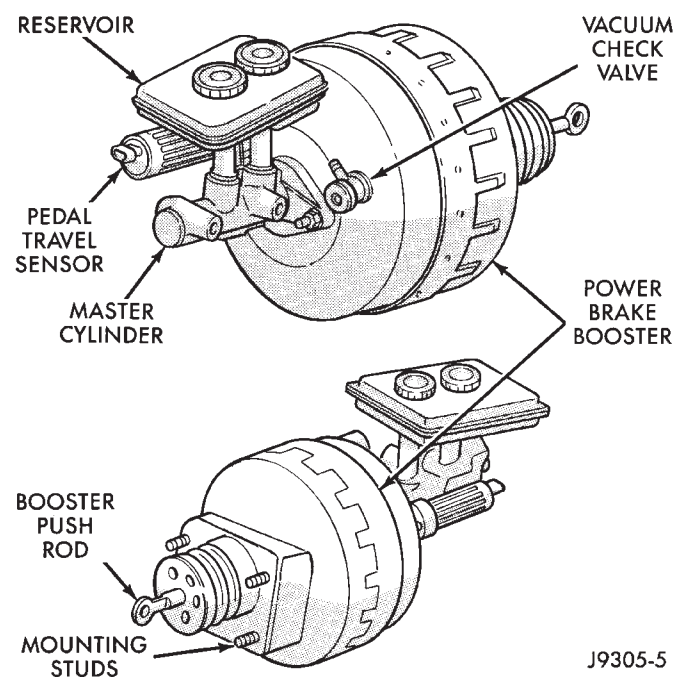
Antilock Power Brake Booster And Master Cylinder
